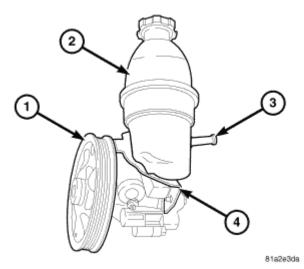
Identifying Drive Pulley, Reservoir & Power Steering Pump Courtesy of CHRYSLER LLC
